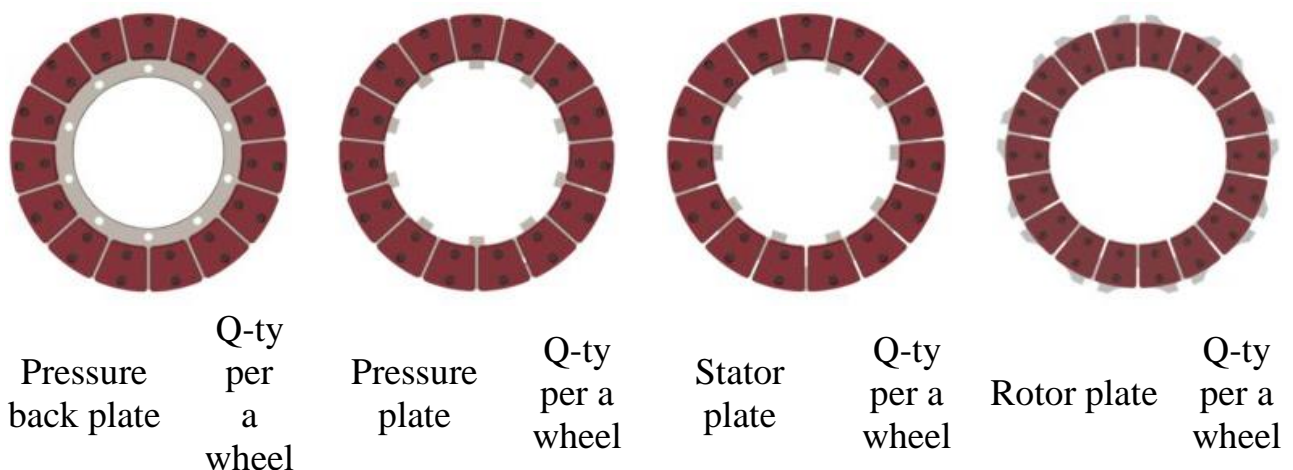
Structure and Design of Wheel Brake Discs for Brake Wheels of the An-32, An-72 and An-74 Aircraft Landing Gear
